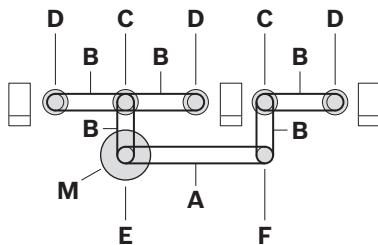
Exchanging toothed belts and/or multi V-belts, assembly (2/4)
